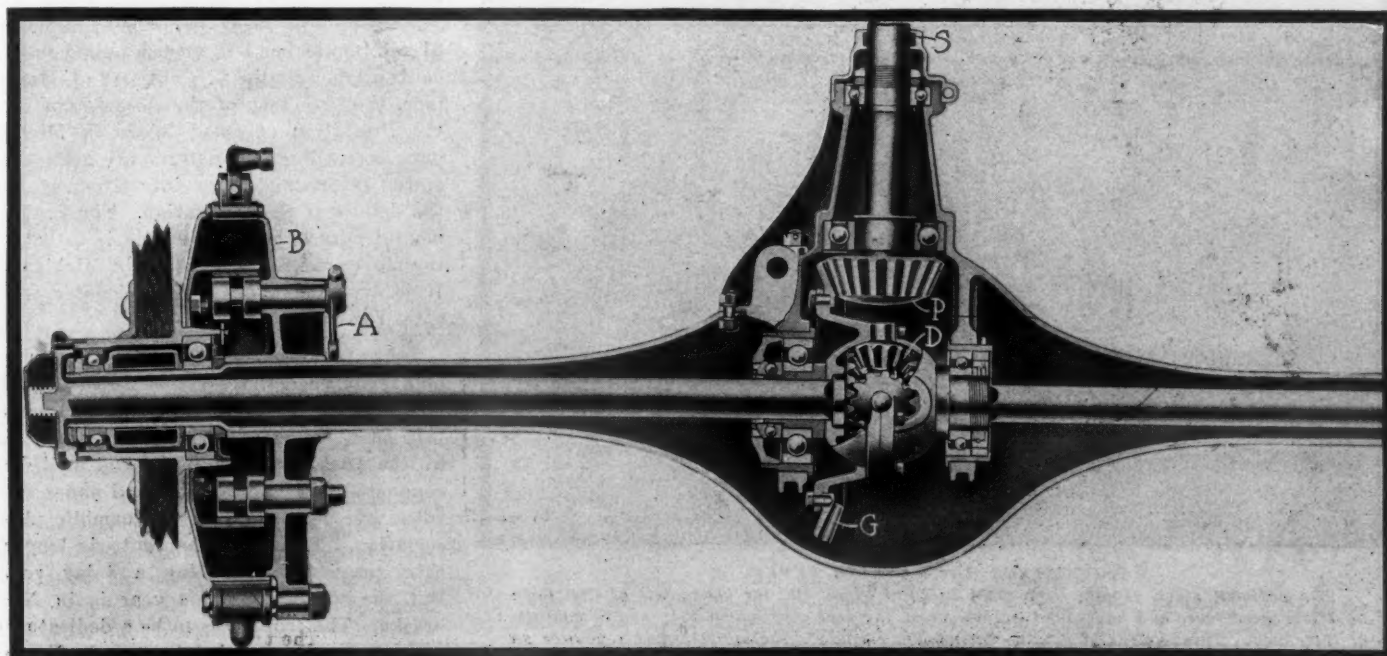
SECTIONAL VIEW OF KNOX REAR AXLE SHOWING CONSTRUCTION OF DIFFERENTIAL
